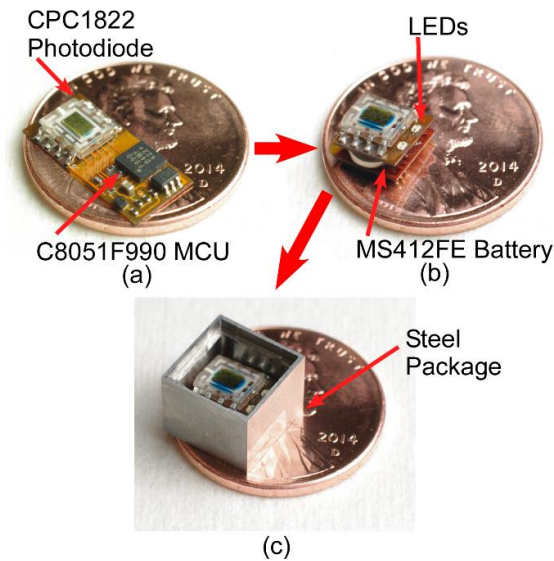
(a) Photo of flexible polyimide PCB before assembly. (b) Photo of the folded electronics stack. (c) Photo of the prototype microsystem in a stainless steel package [Li17].
